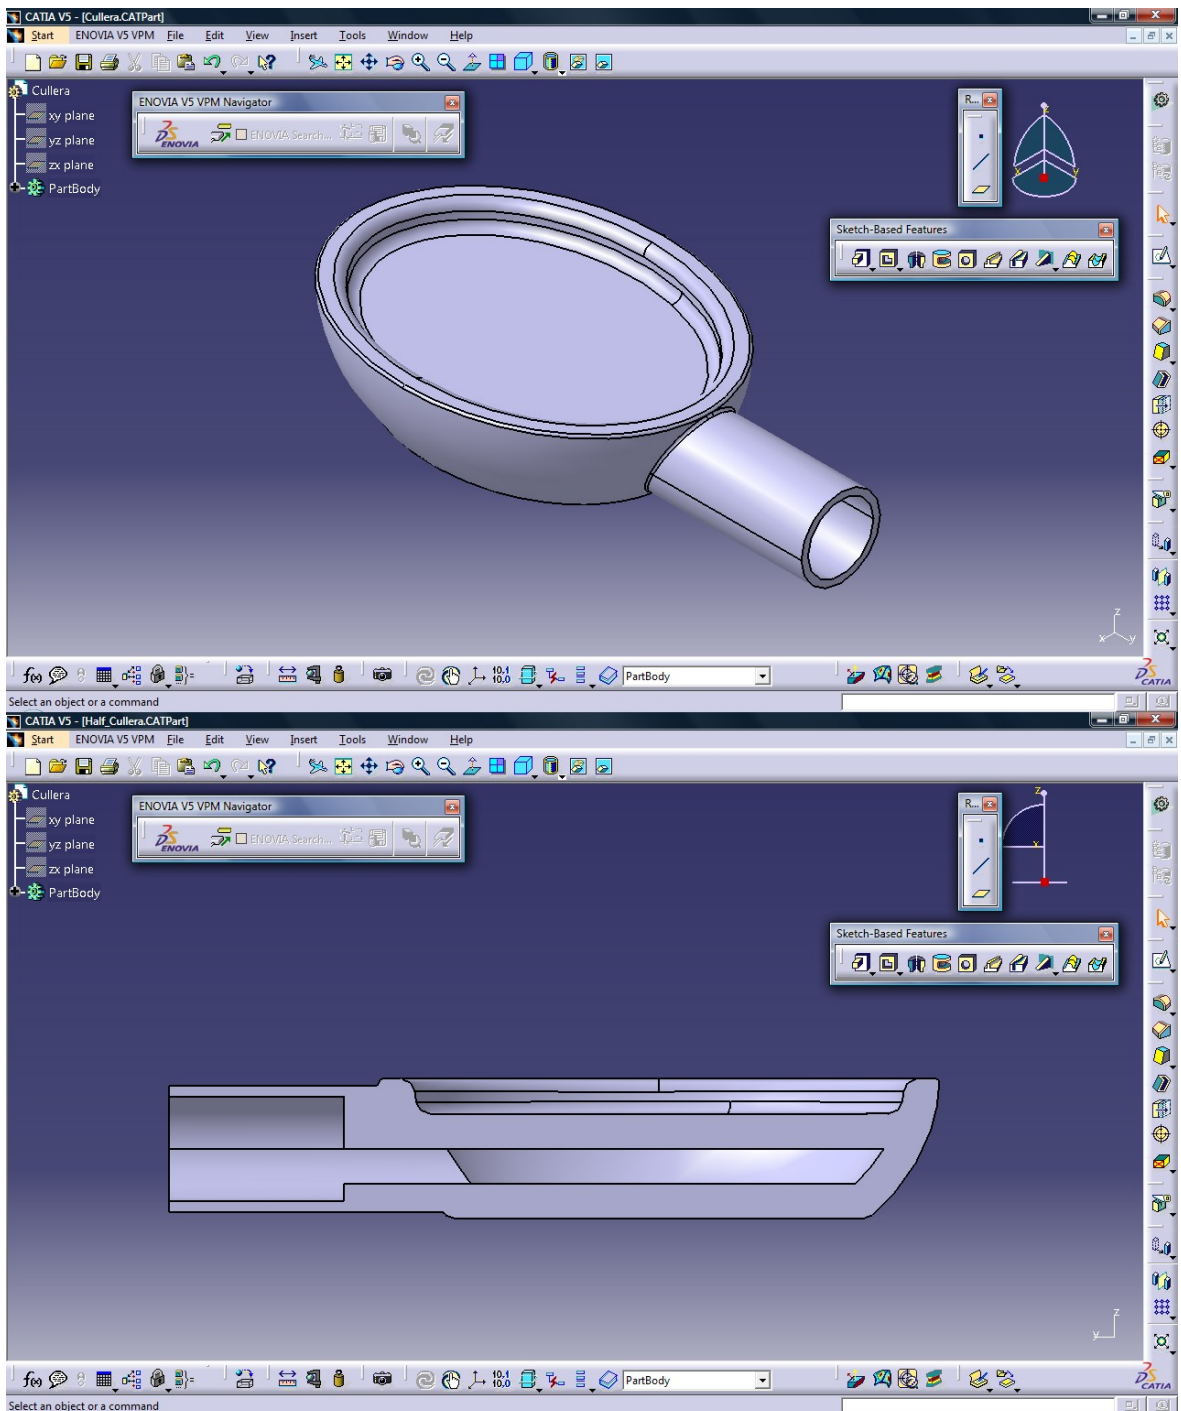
Full solid spoon and full spoon with concavity (half view) CAD design
